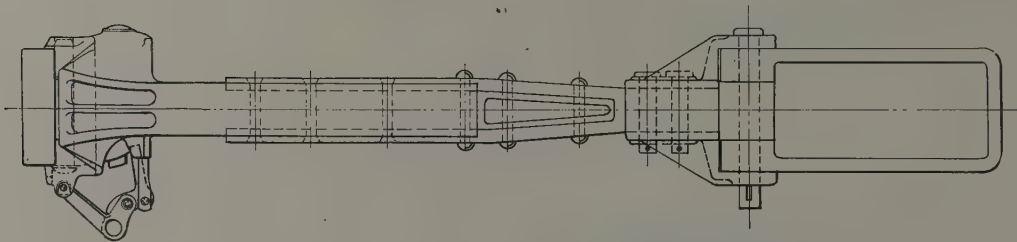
Cast Steel Connection Between Wrought Shank and Yoke for Quadruple Shear Pivot Pin.
